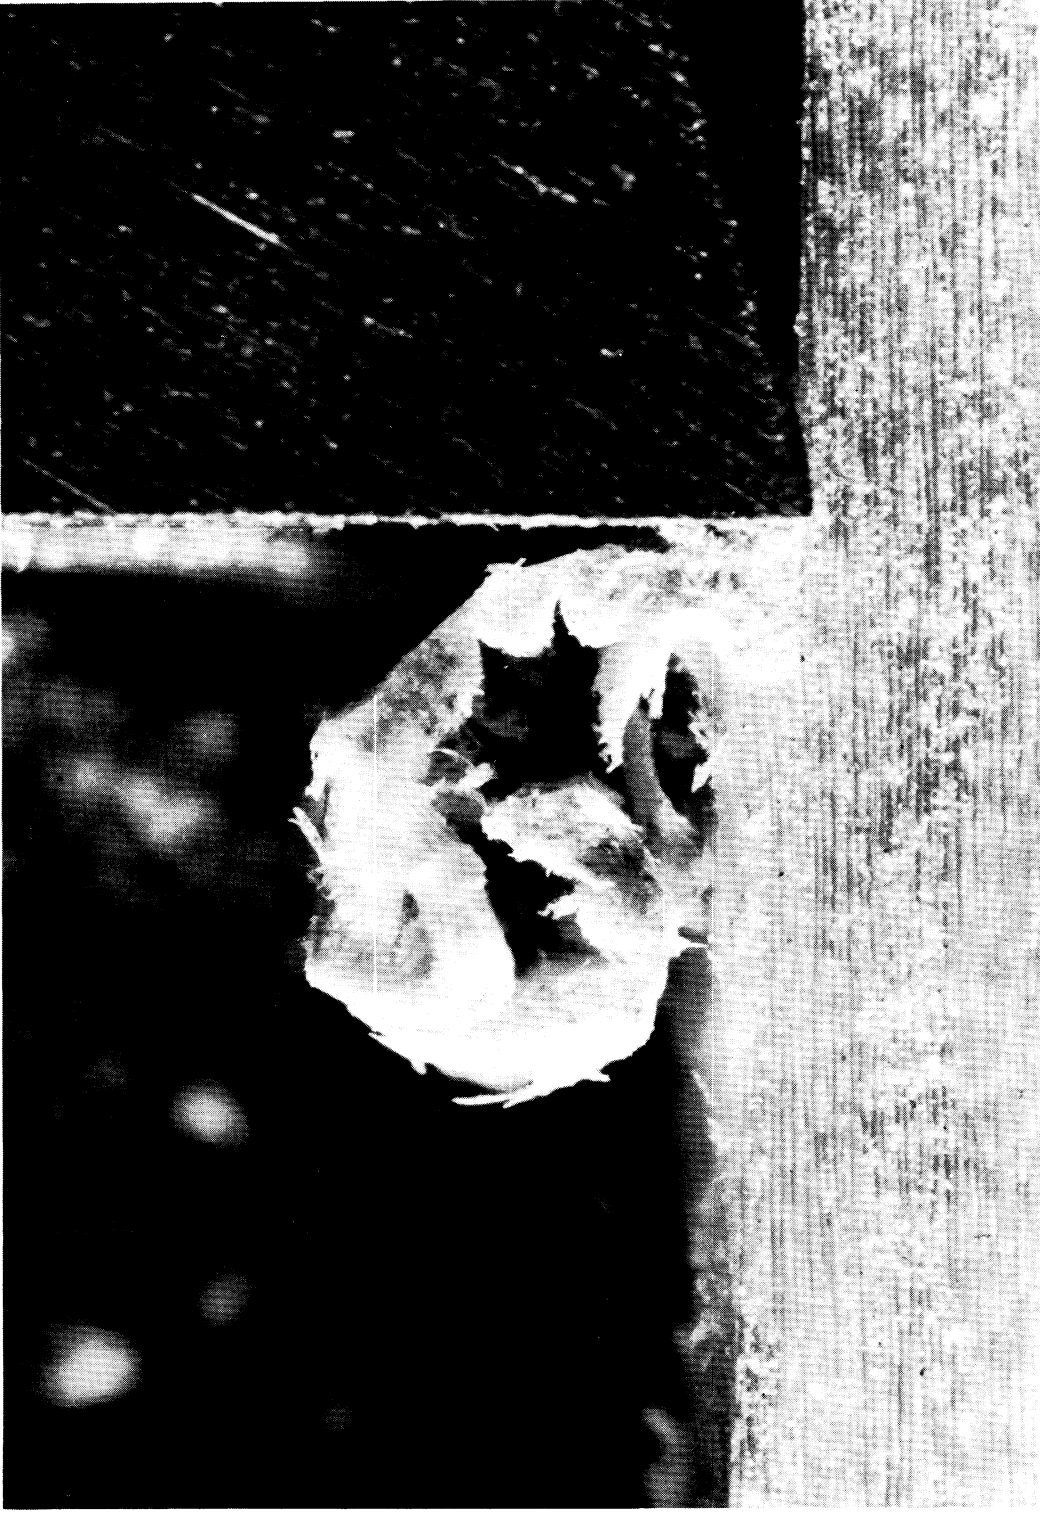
The Type III chip, showing compression of the wood ahead of the tool.
